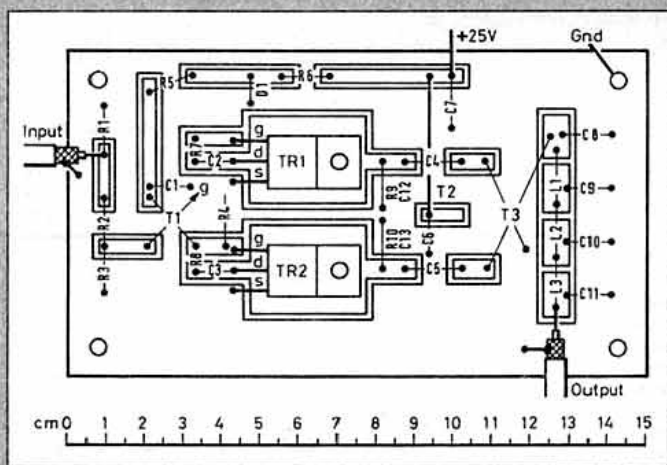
Component and PCB layout for the 25W MOSFET amplifier using double-sided PCB with the other side forming continuous ground-plane (reproduced half actual size).
